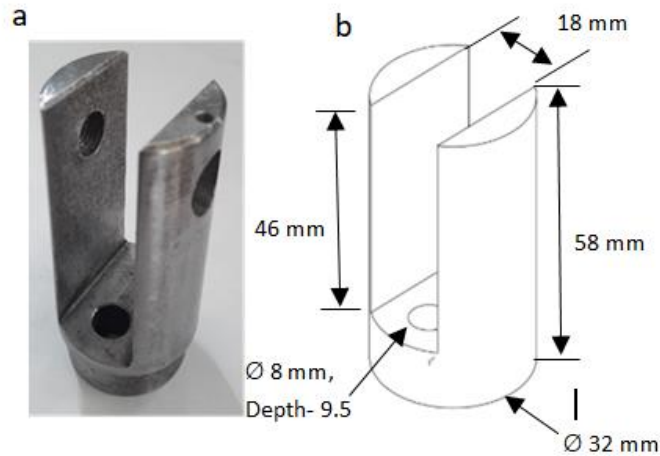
(a) Actual part to be machined; (b) Considered part features for the study
